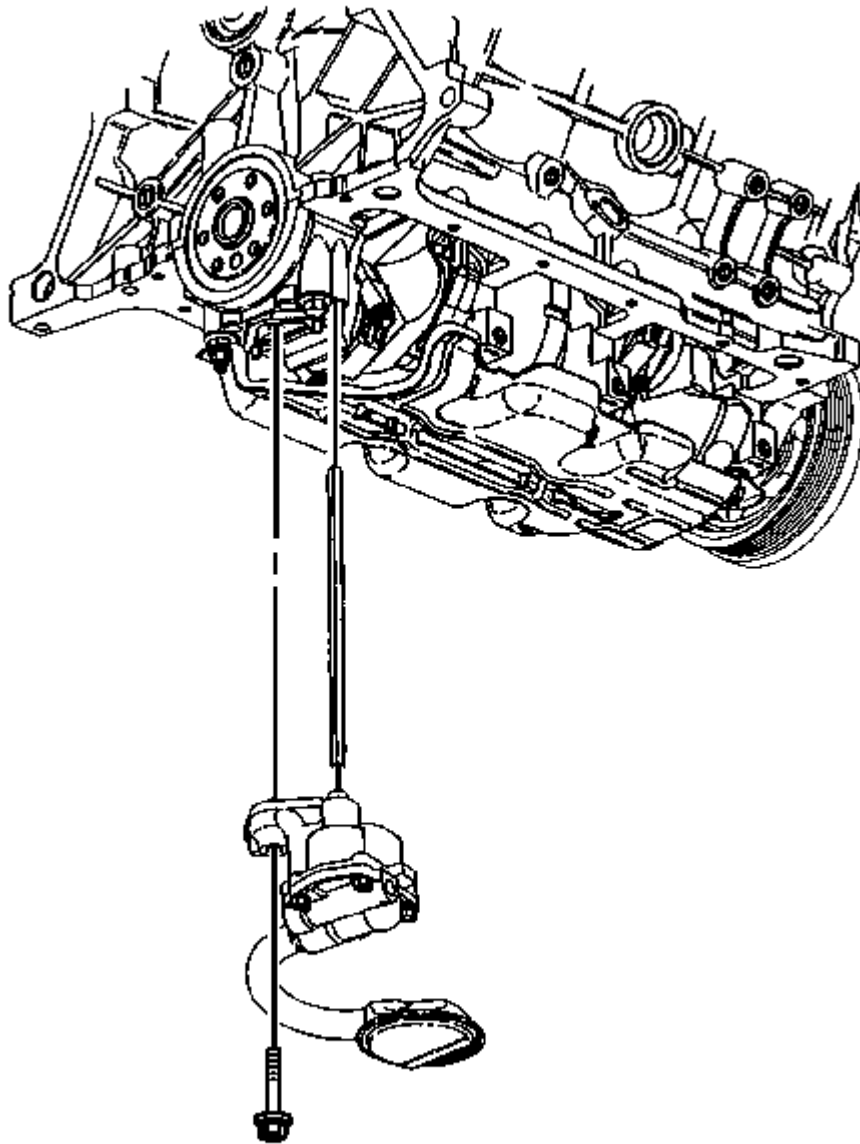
Removing/Installing Oil Pump & Oil Pump Drive Shaft
